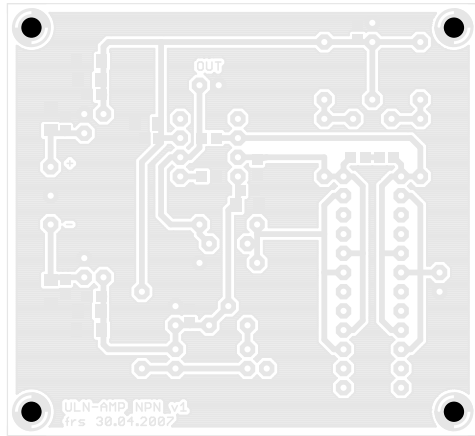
Board bottom view showing drills with 2.7 mm (0.106 in) diameter
